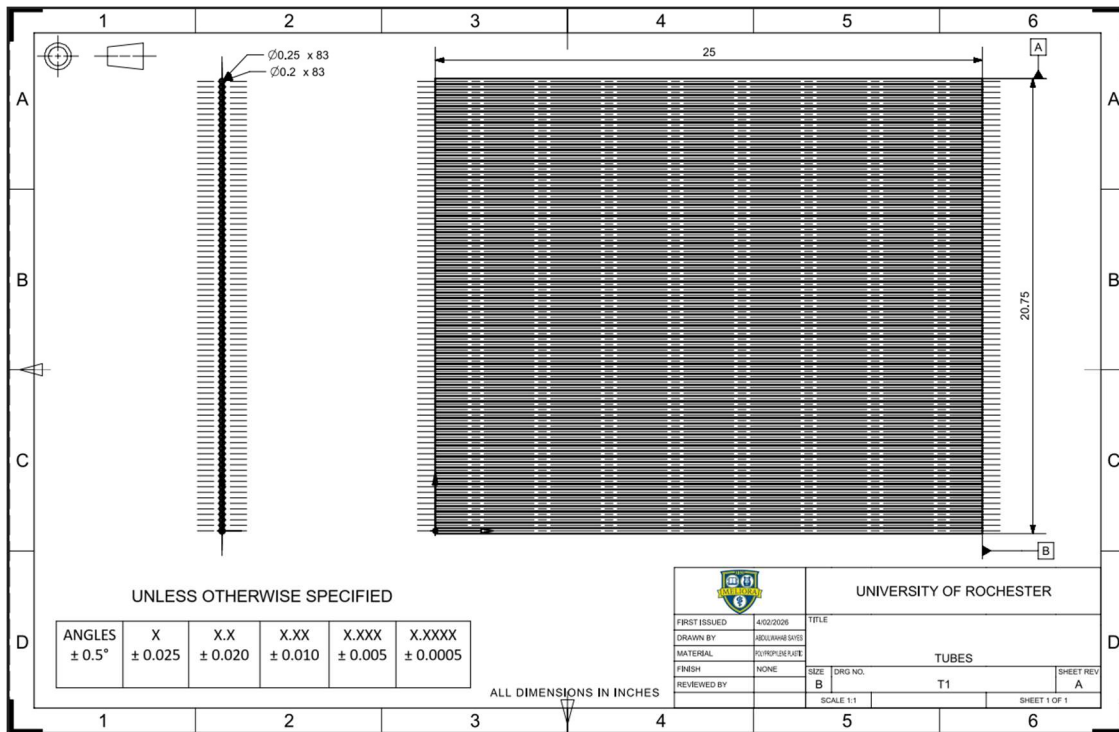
shows CAD drawing of the tubes used to connect the two manifolds together.
